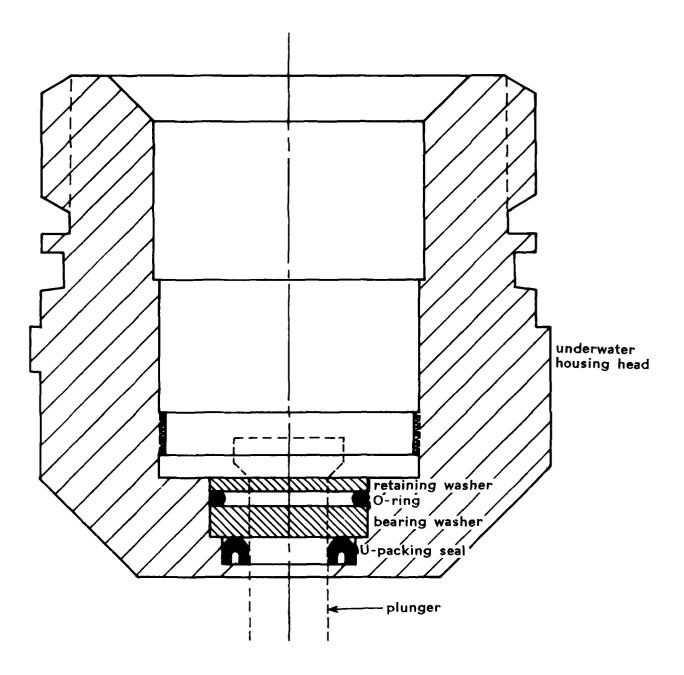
Detail of rock classifier underwater housing head showing placement of U-packing seal, bearing and retaining washers, and O-ring.
